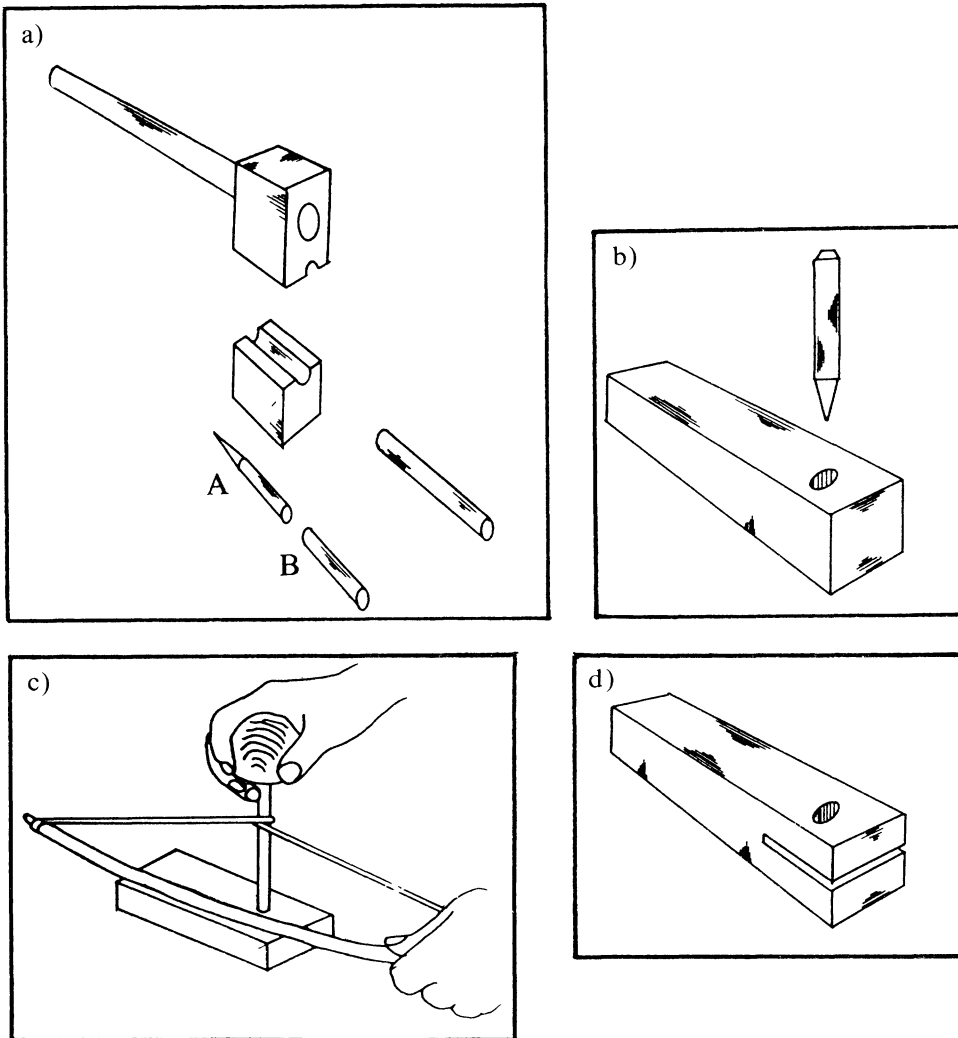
Stages in producing a punch and die. (a) Steel rod made between swages; (b) Tapered punch used to punch a hole; (c) Bow drill used for lapping punch into die; (d) Slot cut into the end of the bar.
